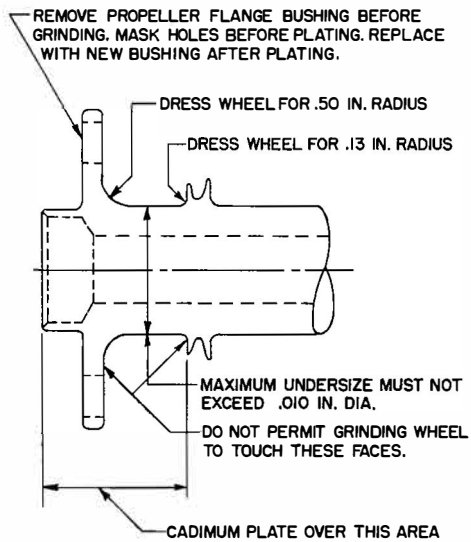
Reconditioning Crankshaft Oil Seal Surface
